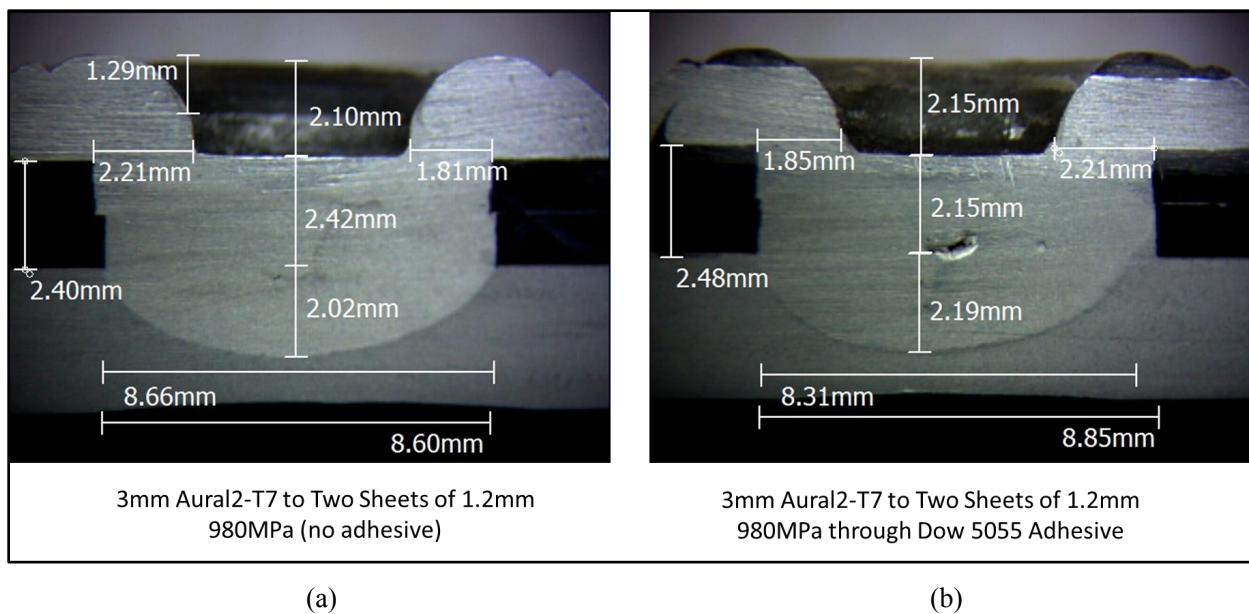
C.2. Weld Sections of (a) 1.2 mm 980MPa to 1.2 mm 980MPa to 3.0 mm Aural 2-T7 and (b) using the F7-5 and 9 mm Pilot Holes in the Steel Sheets – left no adhesive, right Dow 5055-C adhesive. Source: Arconic.
